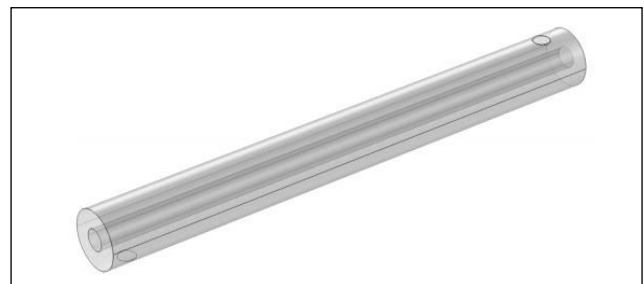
Example of a straight pipe heat exchanger with inner pipe.
